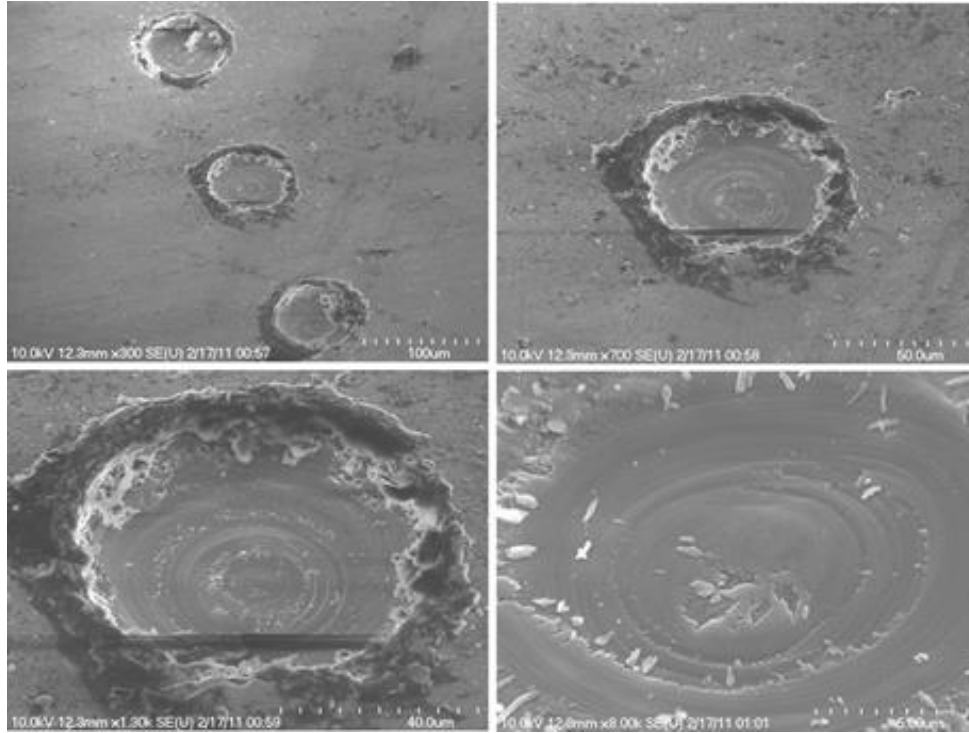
SEM images showing the holes fabricated by physical micro-milling machine. The sample surface and holes were damaged by milling.
